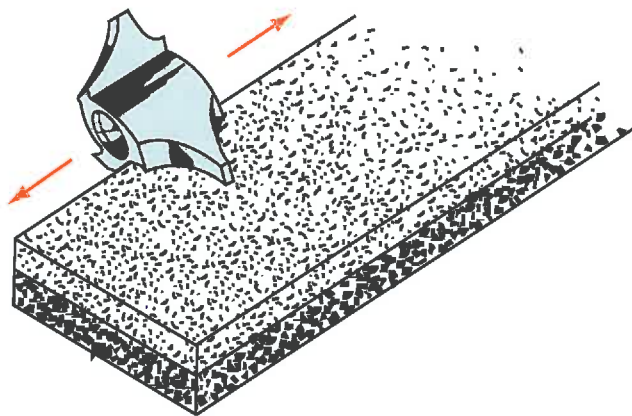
Hone only the leading surface on shaper cutters and router bits.
